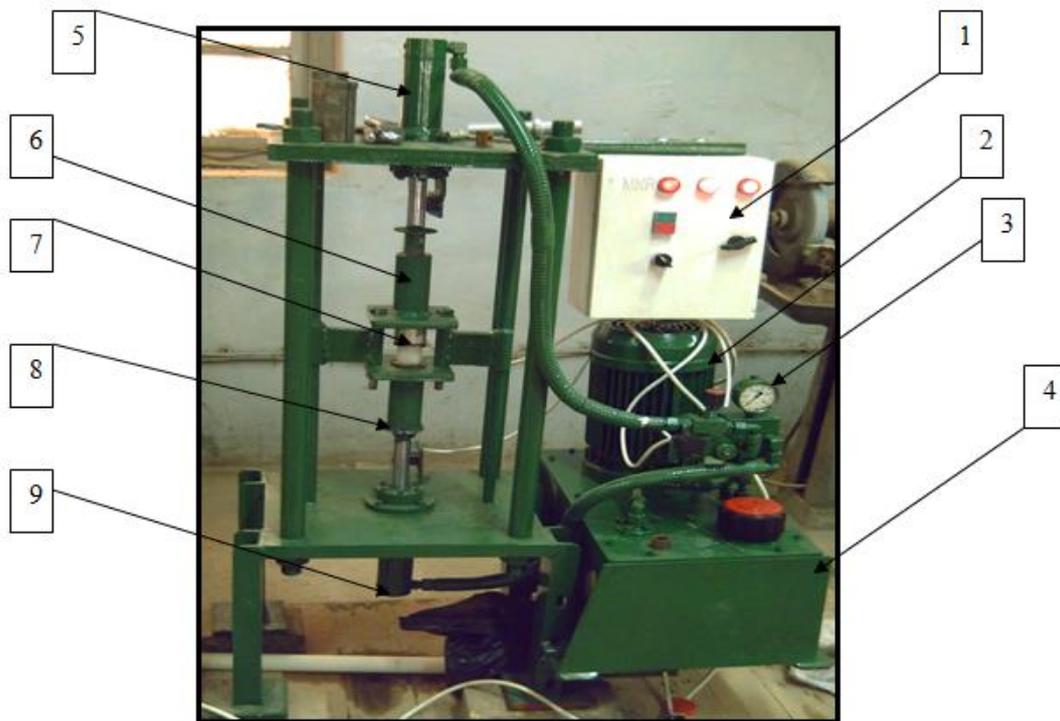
AFM setup :(1) control box, (2)electrical pump, (3) pressure gage, (4) hydraulic unit, (5) upper hydraulic cylinder, (6) upper media cylinder, (7) workpiece and fixture,(8) lower media cylinder, (9)lower hydraulic cylinder
